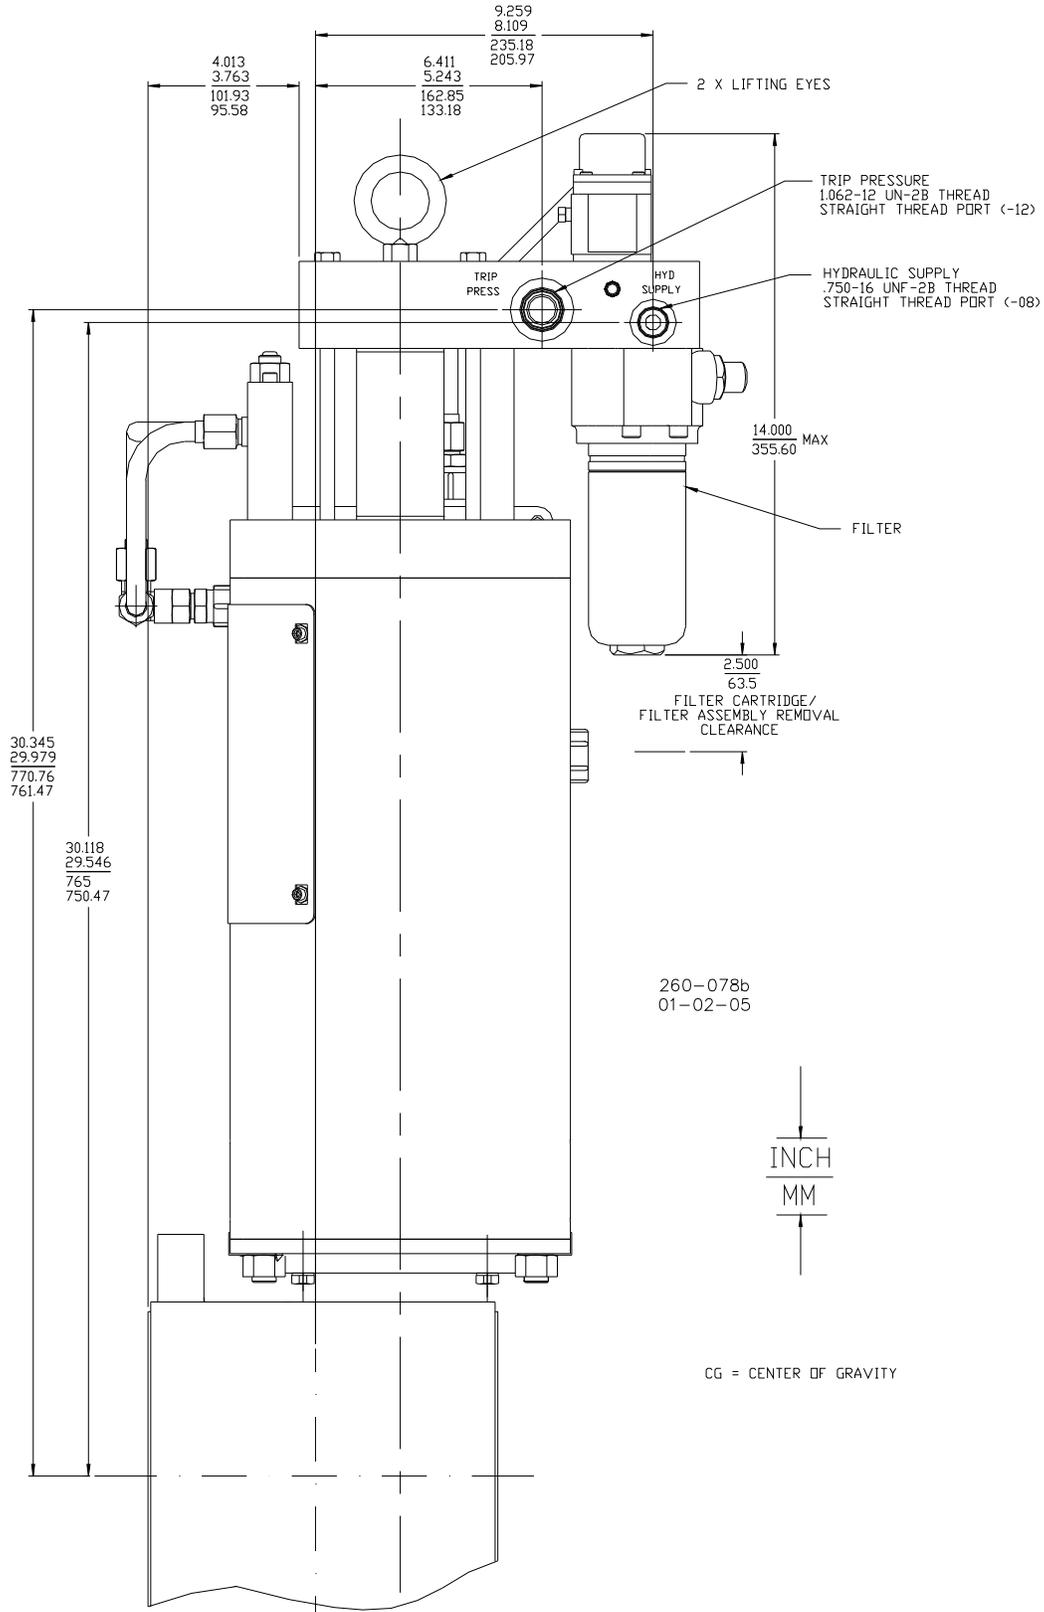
Gas Stop/Ratio Valve Outline Drawing (6-inch, except SS-260)
